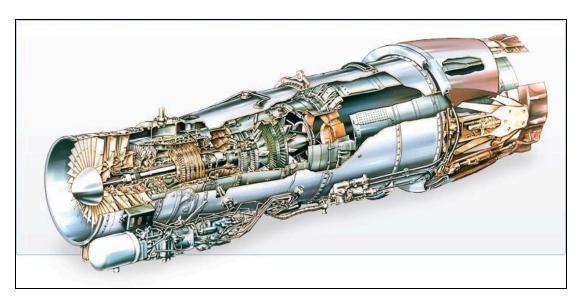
Pratt & Whitney J58 Engine Cutaway [4].
